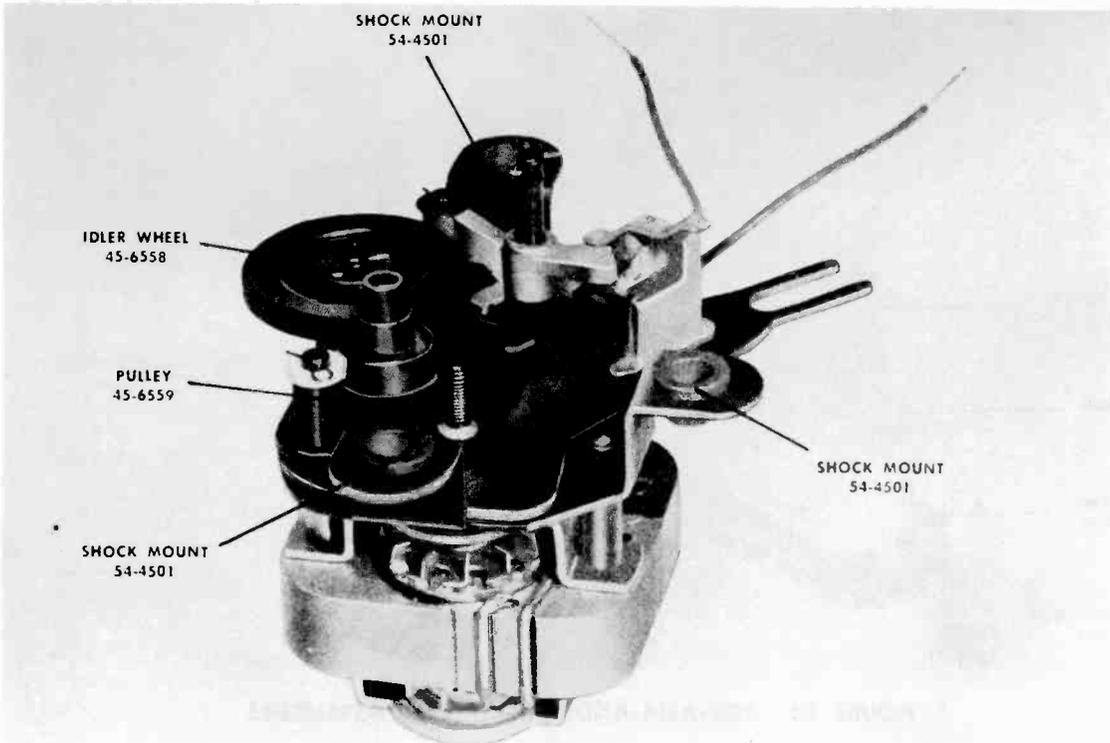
MOTOR ASSEMBLY—PART NO. 35-1433
